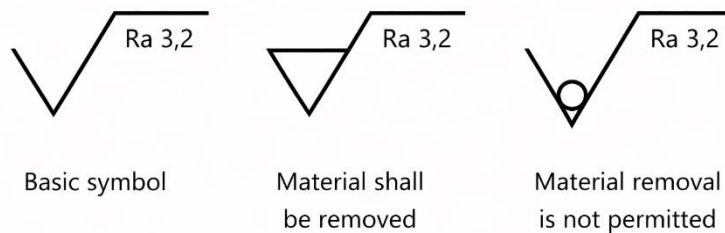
Standardized surface texture symbols used in technical drawings to indicate surface roughness requirements and material removal conditions.
